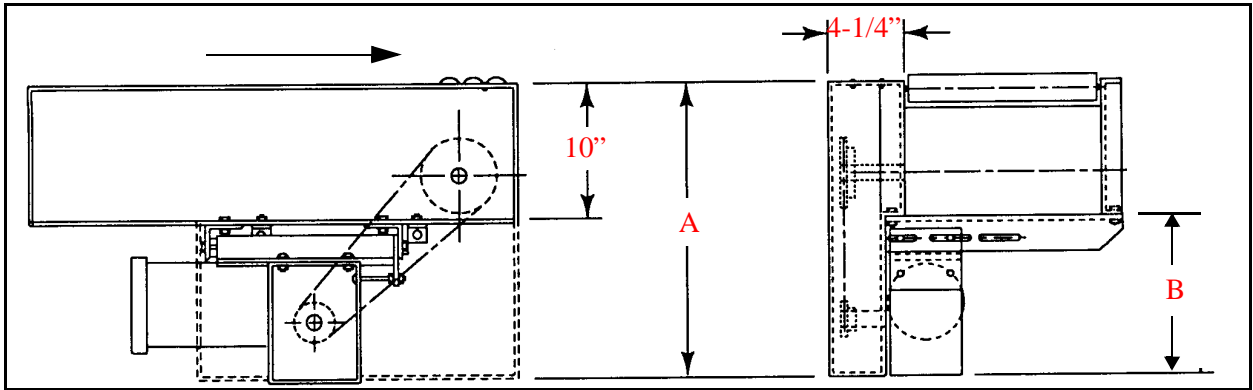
Power Unit - Underhung Mount (UH) RH Assembly Shown
